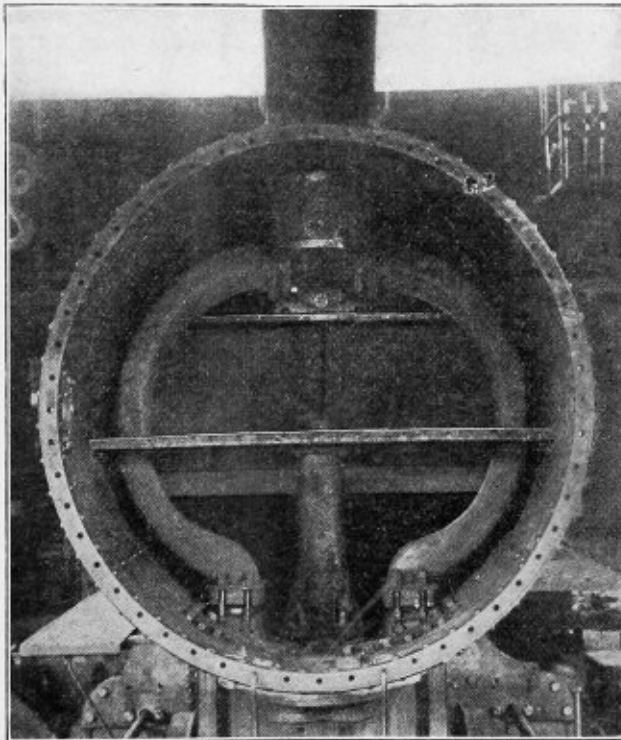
FRONT END OF LOCOMOTIVE BEFORE NETTING DOOR IS APPLIED.
